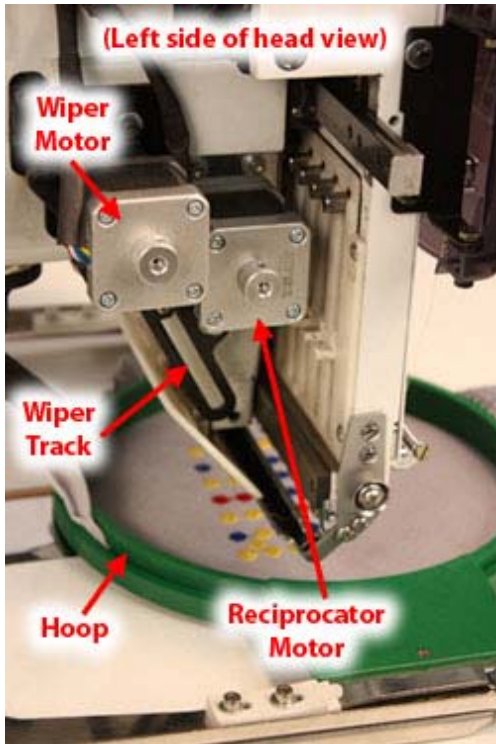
C – Head Left Side – View looking to the left side of the embroidery machine. Various motors are shown on the left side of the machine. The wiper motor control the wipers which grab the embroidery thread after the thread is cut. The reciprocator motor is what controls the arm which grabs the needle bar and moves it up and down.
